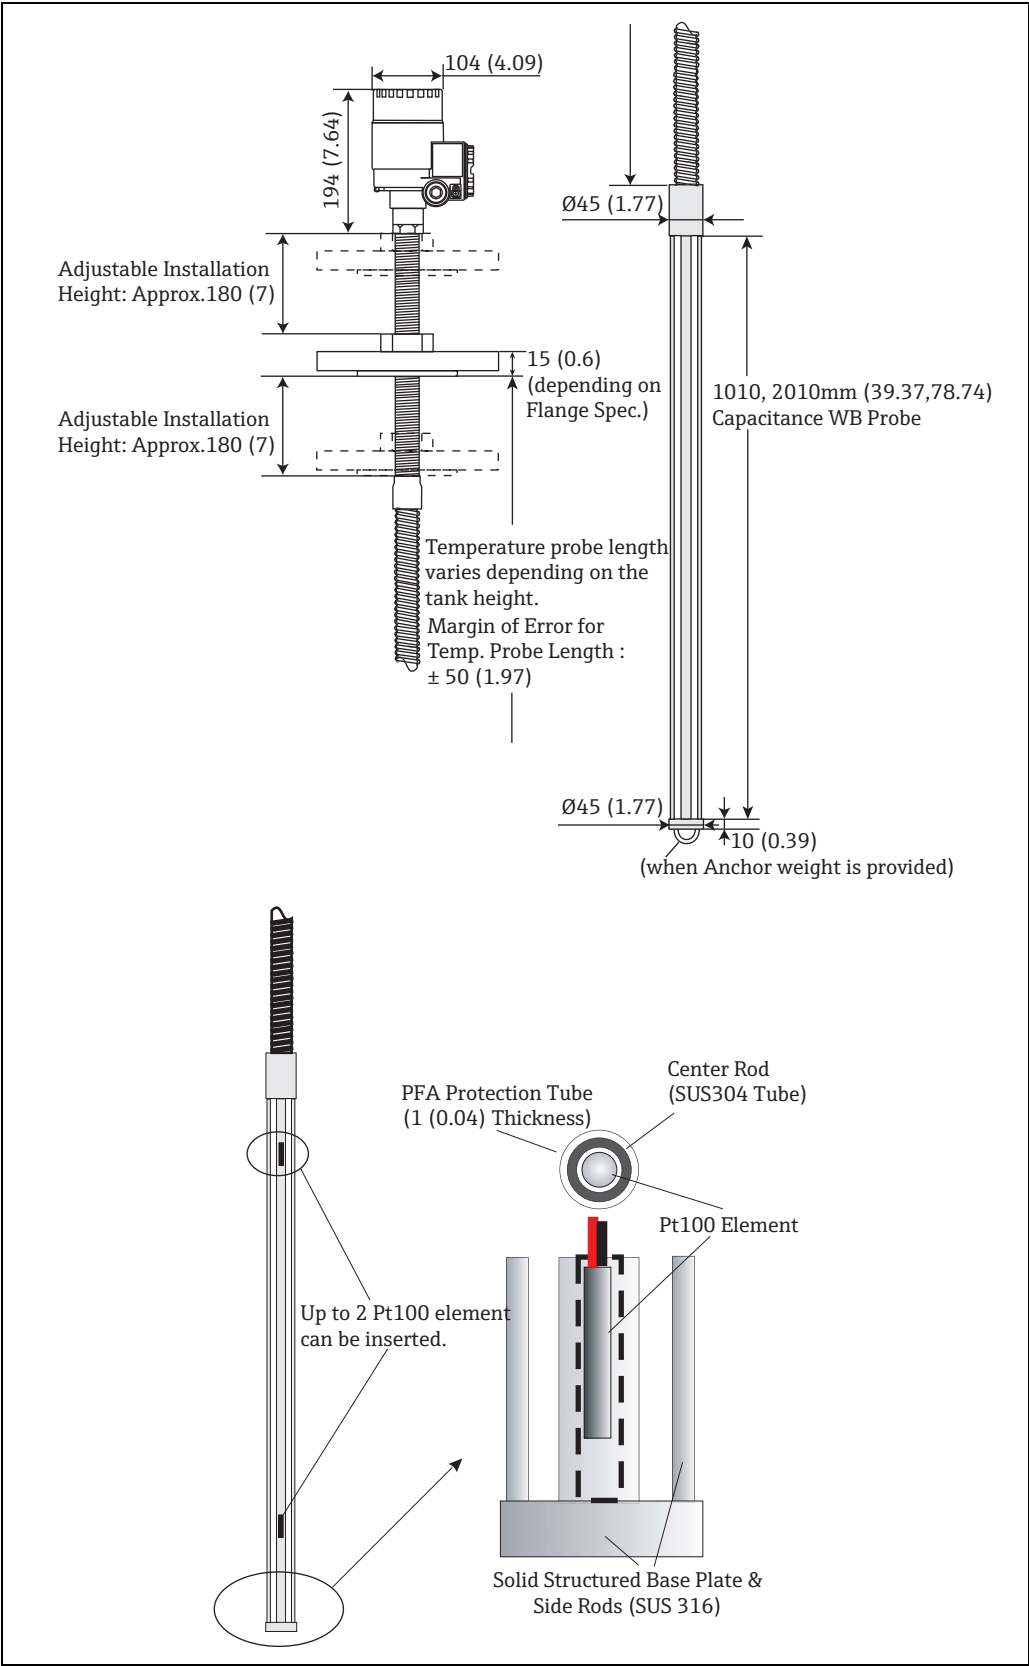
Dimensions for Converter + Temperature + WB Probe Version, Unit of Measurement: mm (in)
